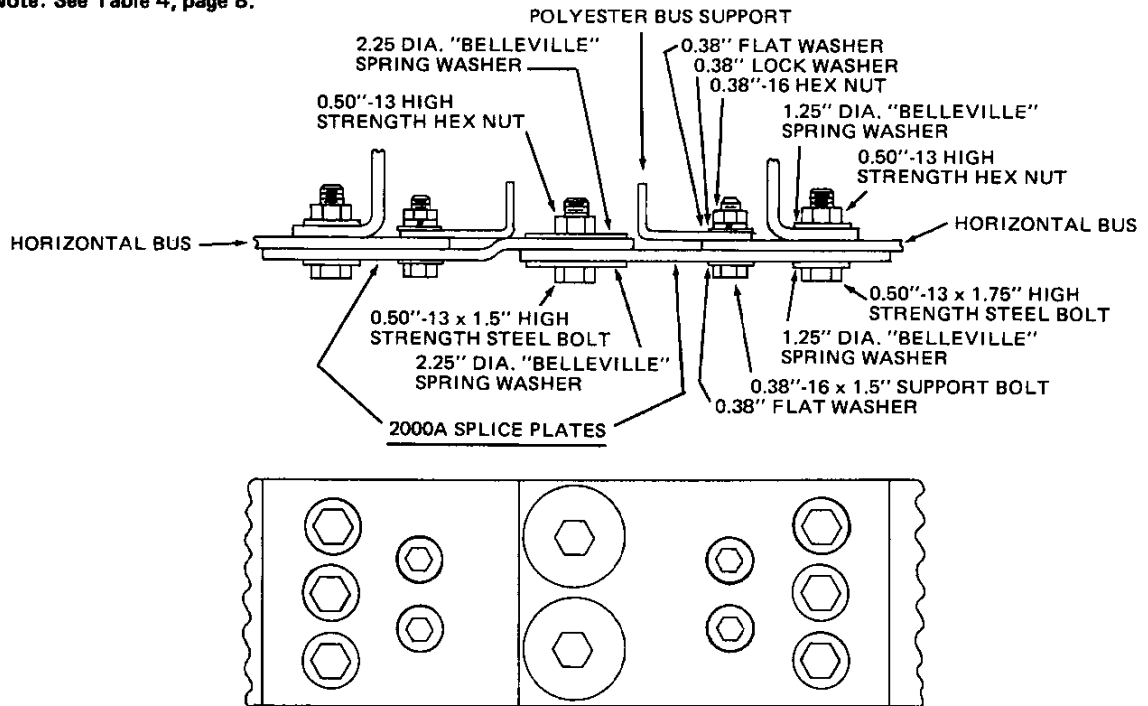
Field Assembly of Joints in 2000 Amp Copper Horizontal Bus
